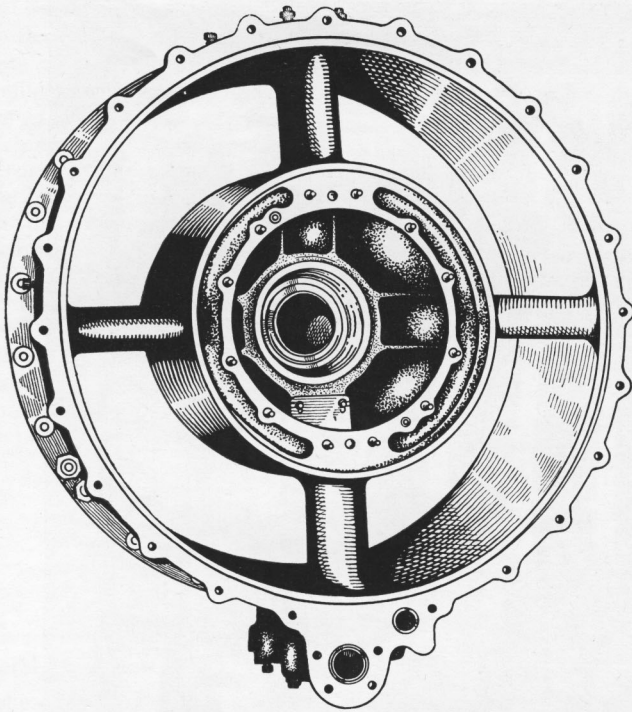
Intake casting front with oil lines at the bottom. Holes in the outer flange are for attaching the oil and starting-fuel tank assembly. Twelve studs on the inner ring hold the bevel gear assembly from which drives for accessories and oil pumps extend through vertical streamlined fairings.
